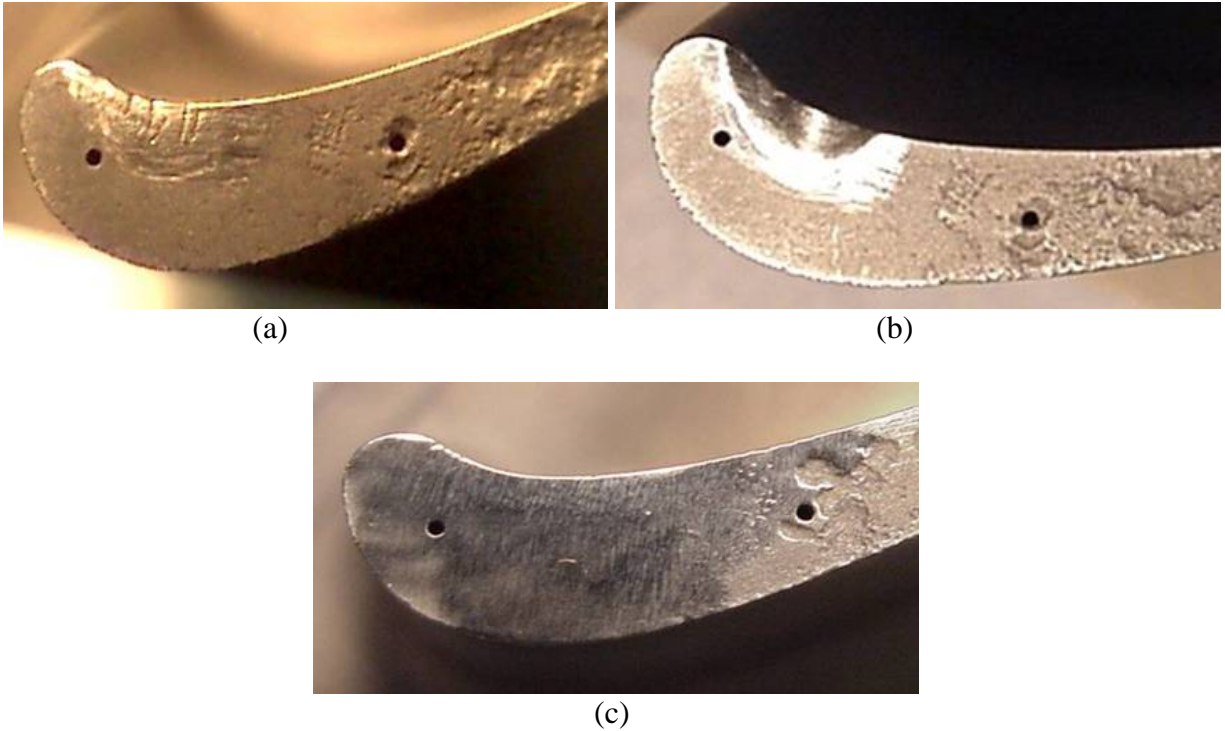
Repair of single crystal turbine blade by ESD: a) as-received blade with thermal fatigue cracks, b) cracks removed by grinding, c) restored by ESD using original materials as filler and finished. [28].
